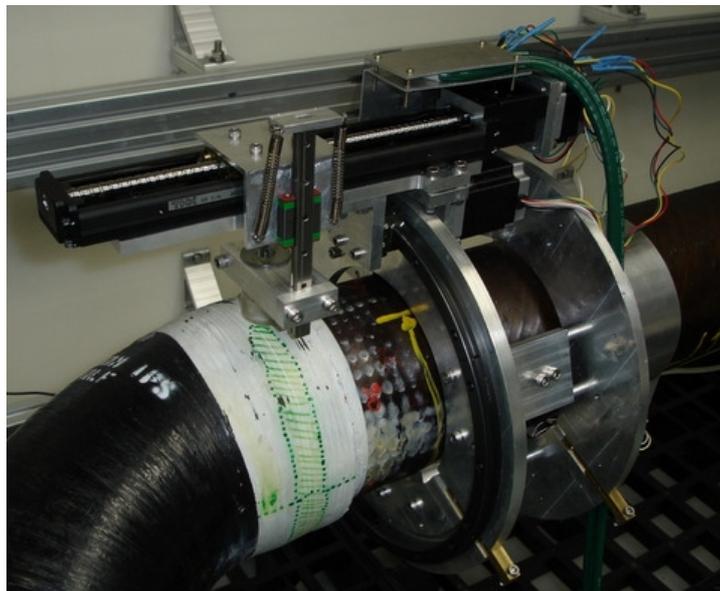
Mechanical parts of the automatic ultrasonic inspection system embracing the pipe.
